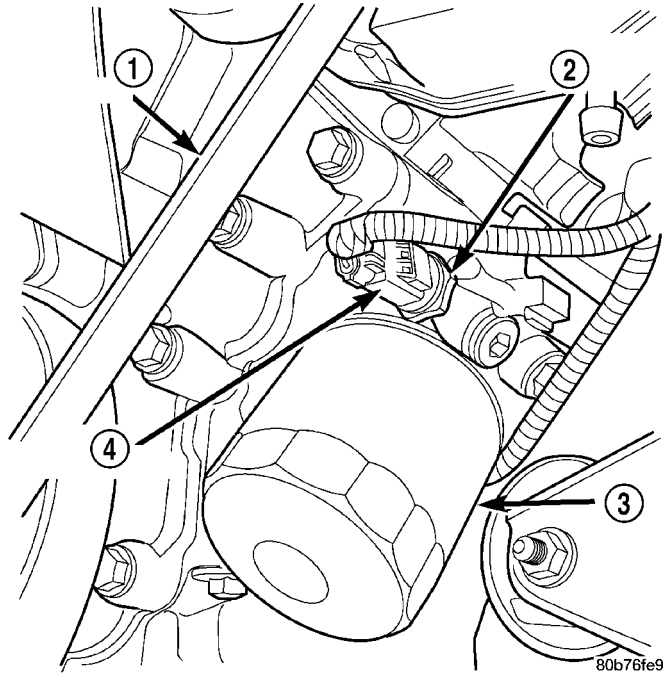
OIL PRESSURE SENDING UNIT -TYPICAL
